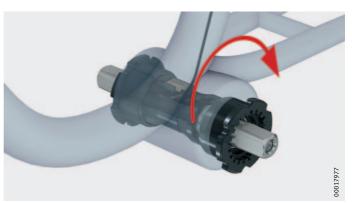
Screwing in the bottom bracket bearing housing on the non-chain ring side
